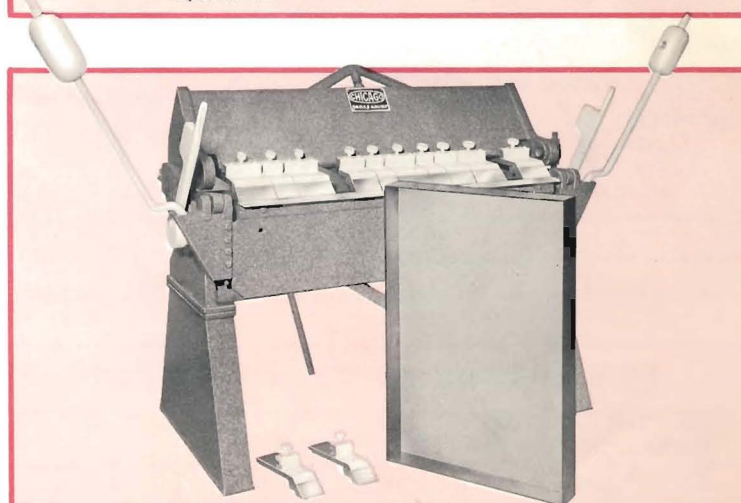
CHICAGO box and pan brake with typical completed box shape.
